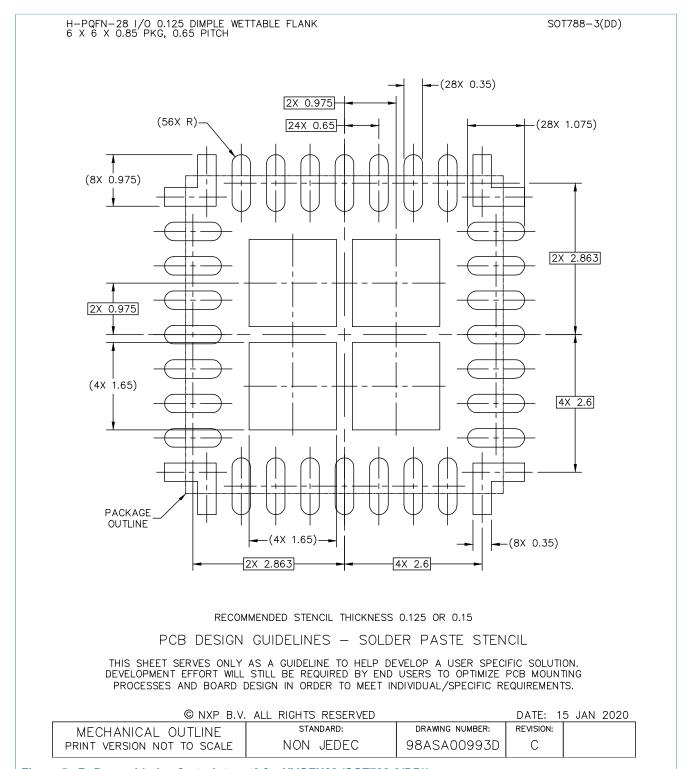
Reflow soldering footprint part3 for HVQFN28 (SOT788-3(DD))
